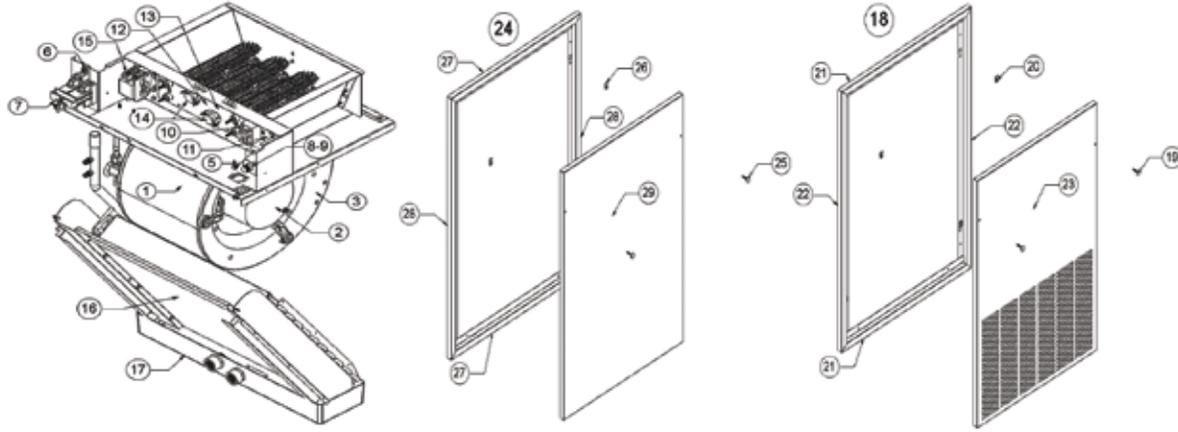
Replacement Parts Schematic – AHW1 / Electric Heat
